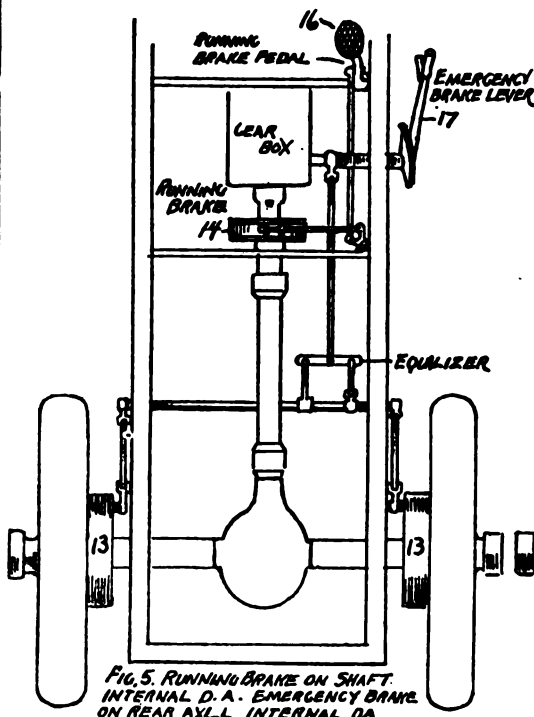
RUNNING BRAKE ON SHAFT. INTERNAL D. A. EMERGENCY BRAKE ON REAR AXLE. INTERNAL D. A.
